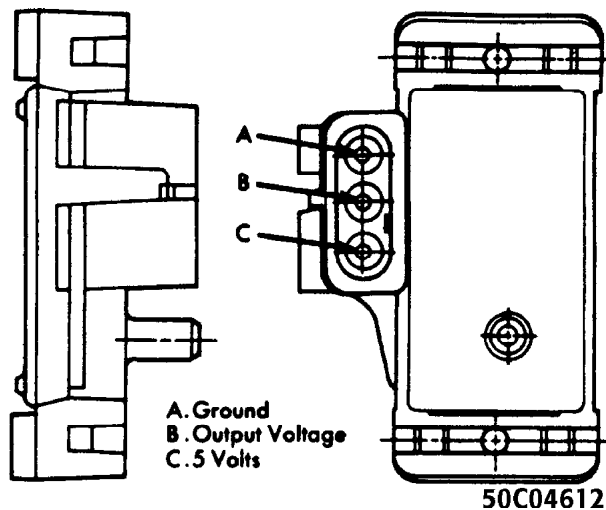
Manifold Absolute Pressure (MAP) Sensor Connectors
